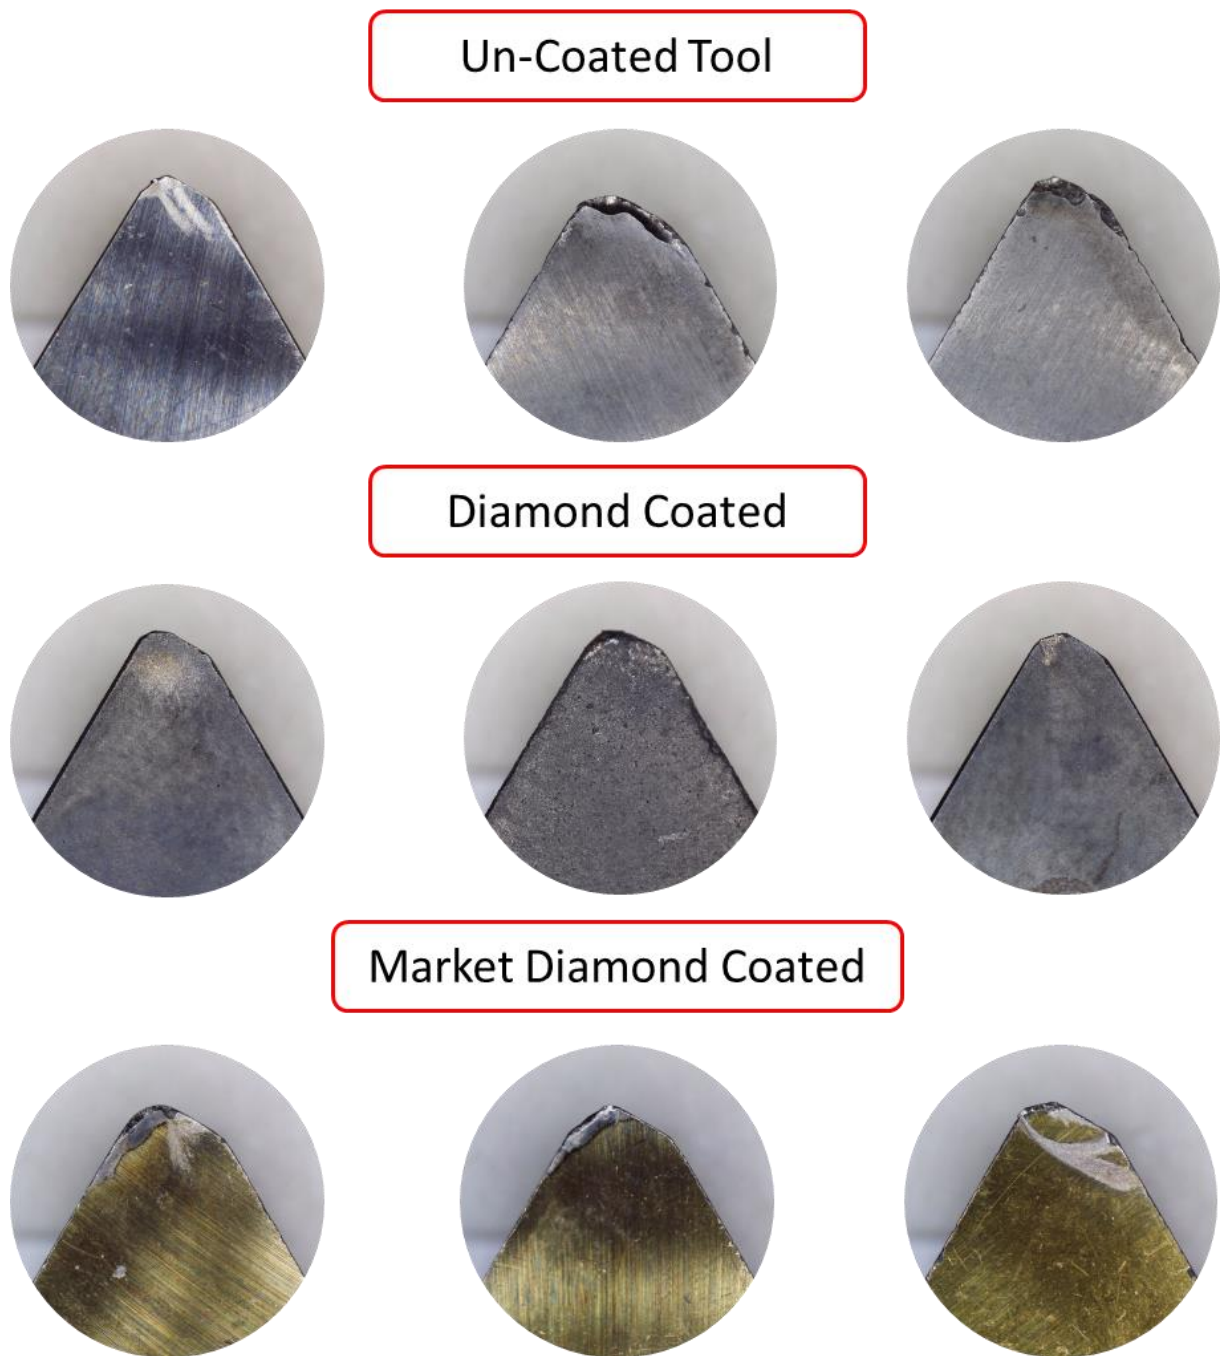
Microscopic images of a few of the worn-out tool inserts.
